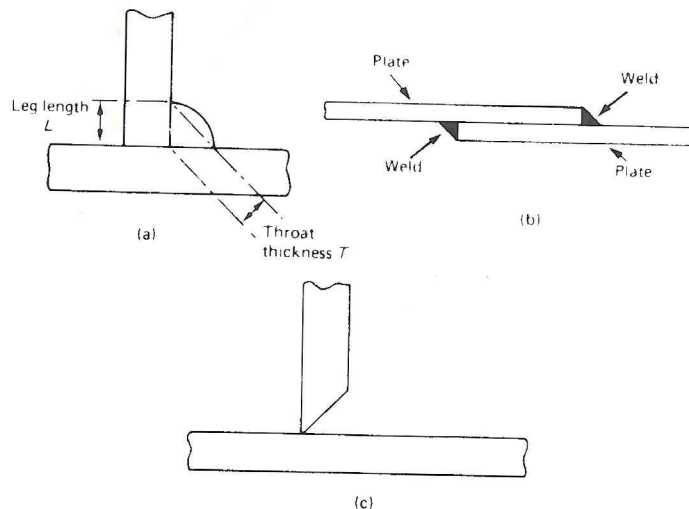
Fillet welds: (a) fillet weld; (b) lap weld; (c) fillet weld with full penetration preparation
